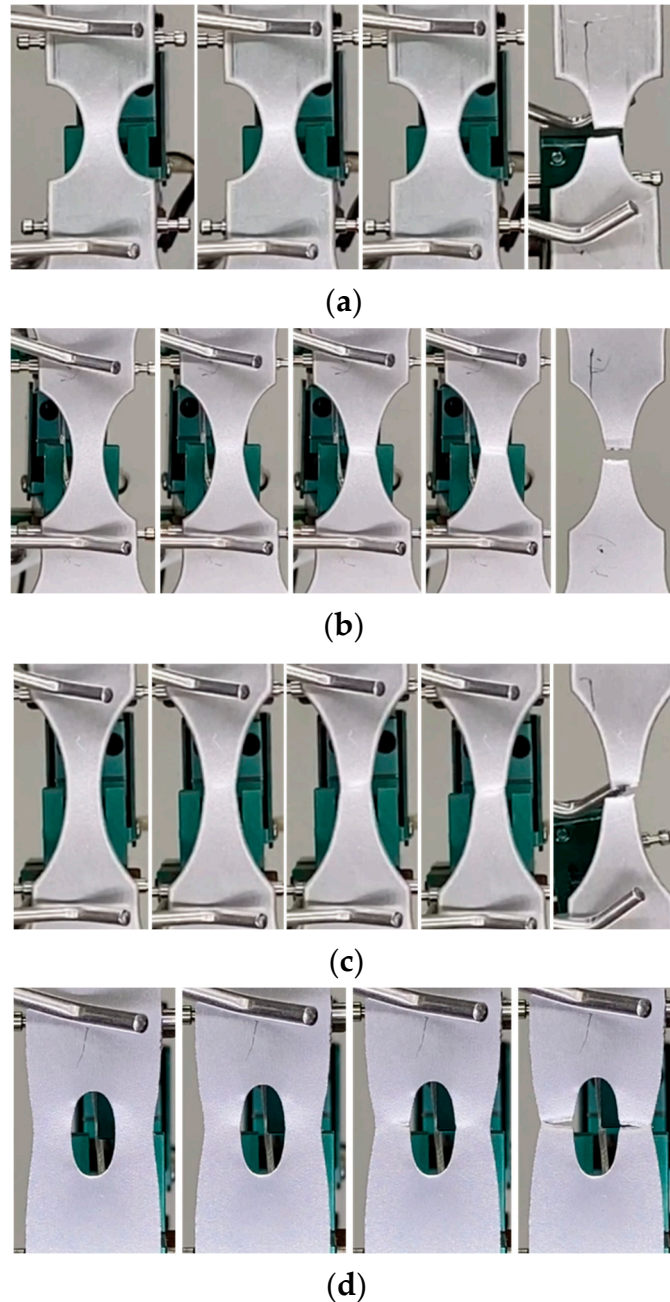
Ductile fracture configuration of 304L stainless steel: (a) NT05 specimen, (b) NT10 specimen, (c) NT15 specimen, and (d) CH03 specimen. Localized necking was clearly observed. The CH specimen showed a localized neck followed by crack propagation.
